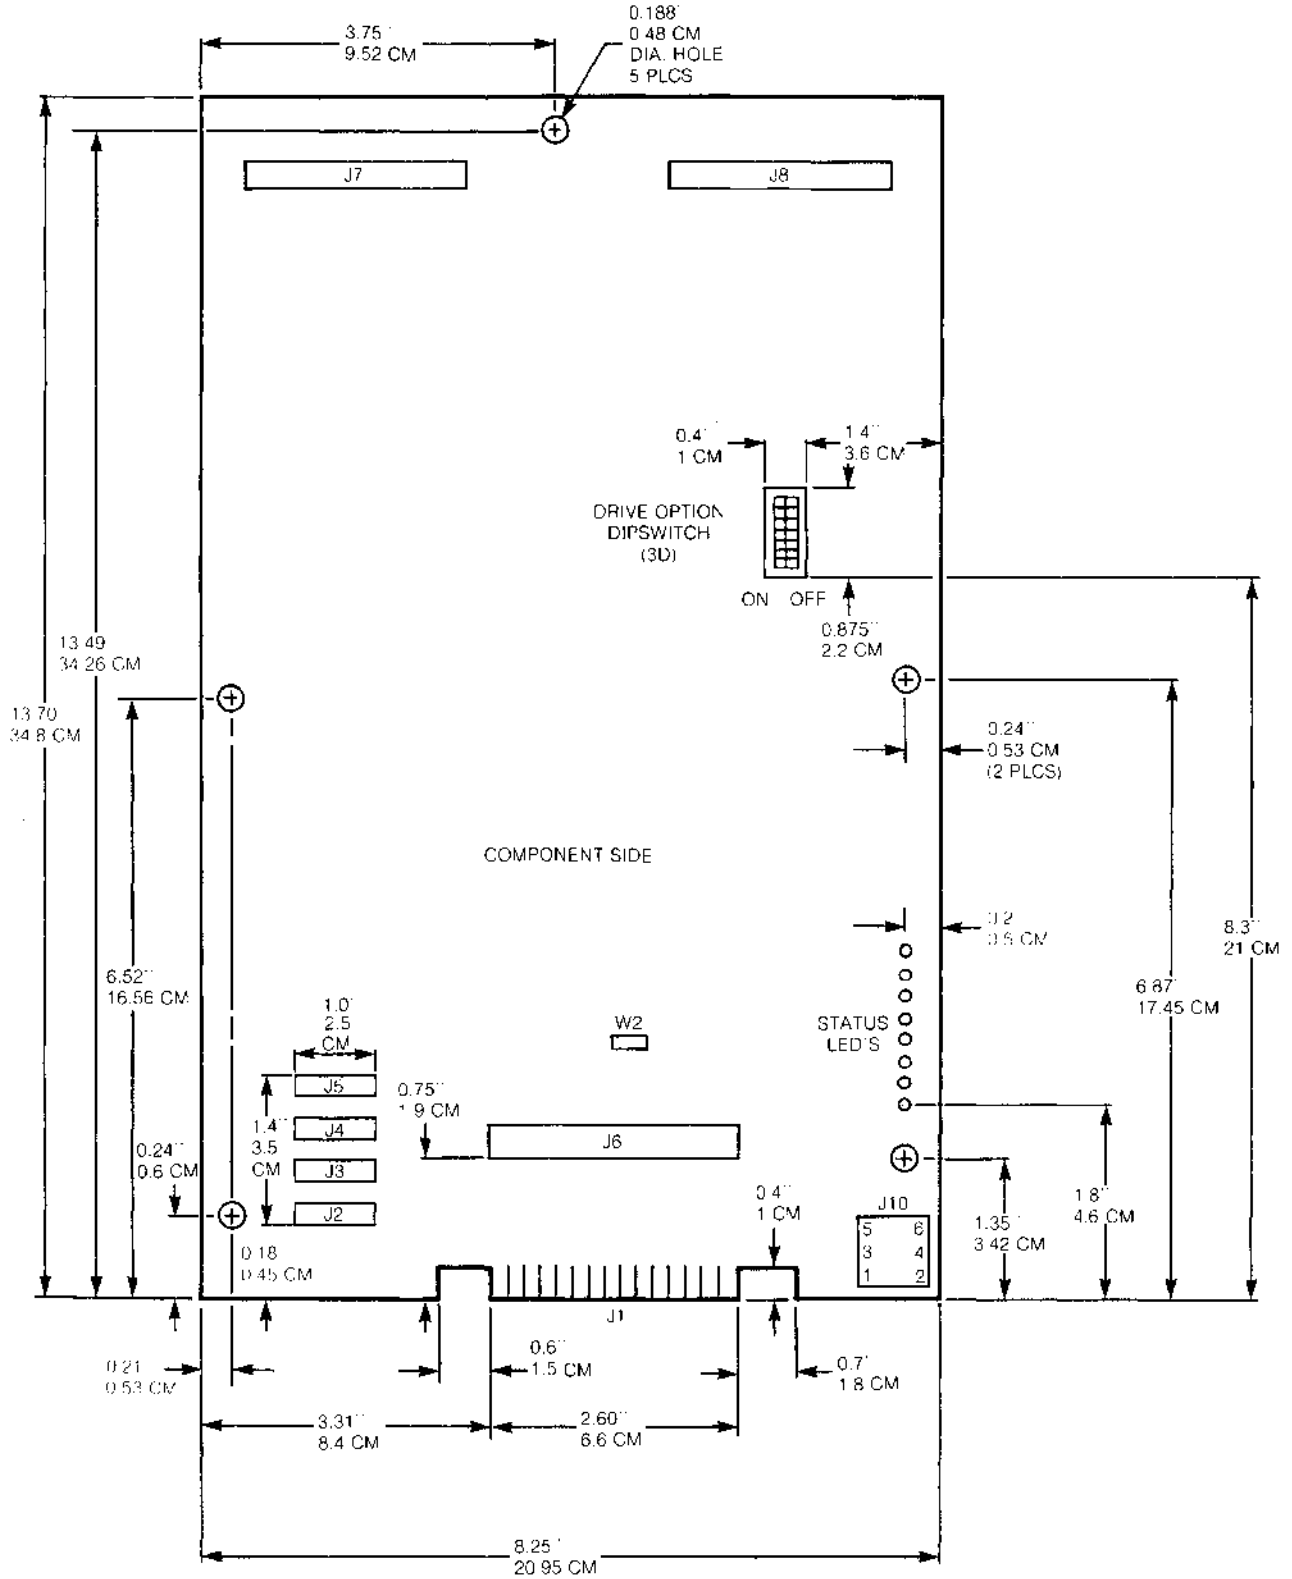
SA1403 DIMENSIONAL DRAWING
